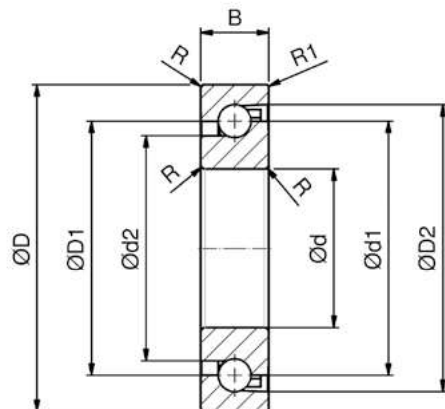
\_\_\_ NTN Angular contact ball bearings BST
